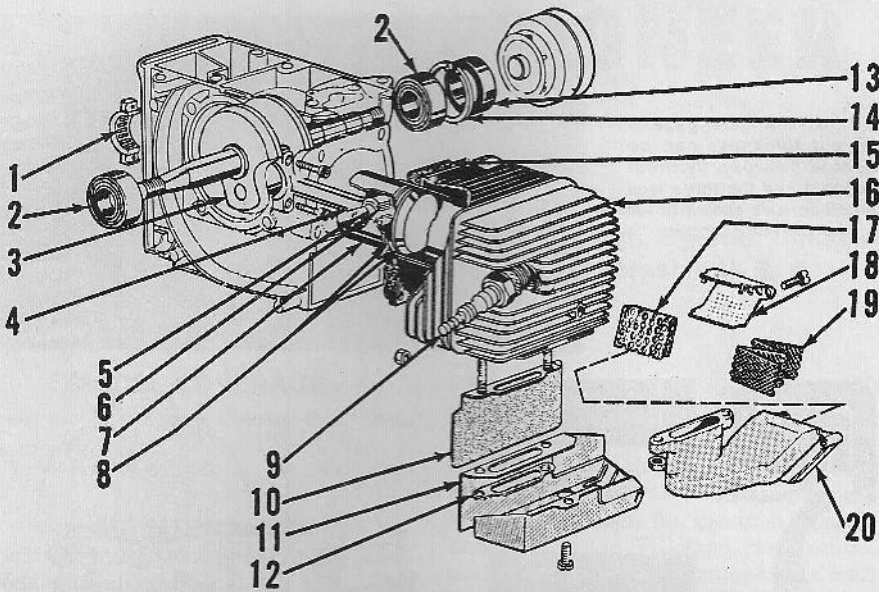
View of engine crankshaft, connecting rod and associated parts. Magneto end crankcase seal and bearing housing is shown in Fig. PR1-7.
